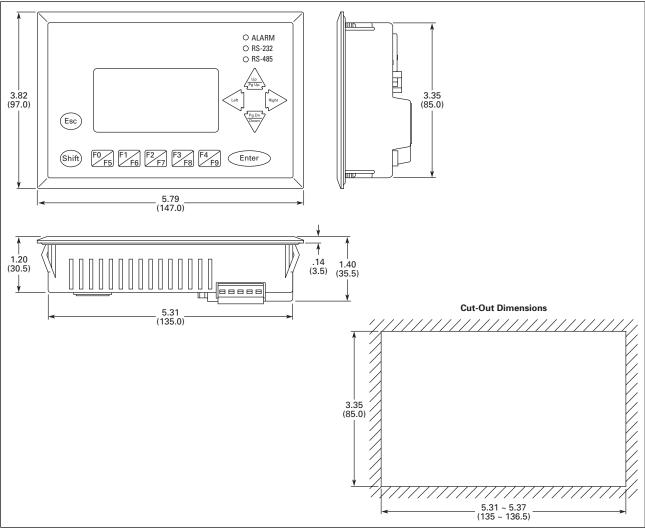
ECL-GP04 — Approximate Dimensions in Inches (mm)
